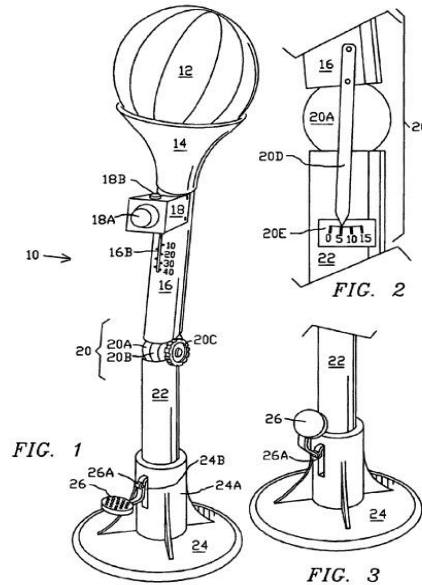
Ball launcher can be set at a pre-adjusted angle to launch inflated sports balls.
